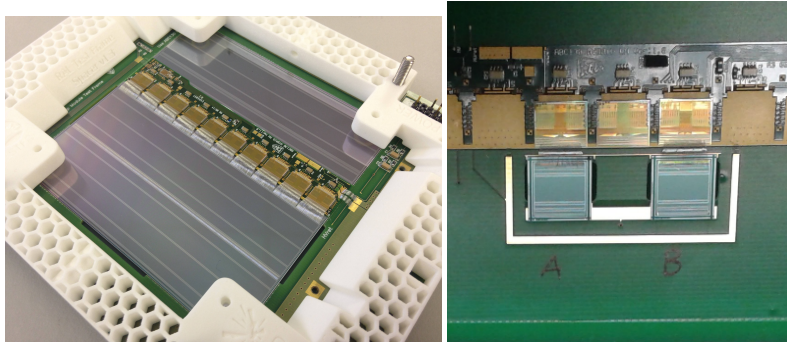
Left: a fully assembled ABC130 Long-Strip Barrel Module (LS4); Right: a DAQload (DAQload10).
